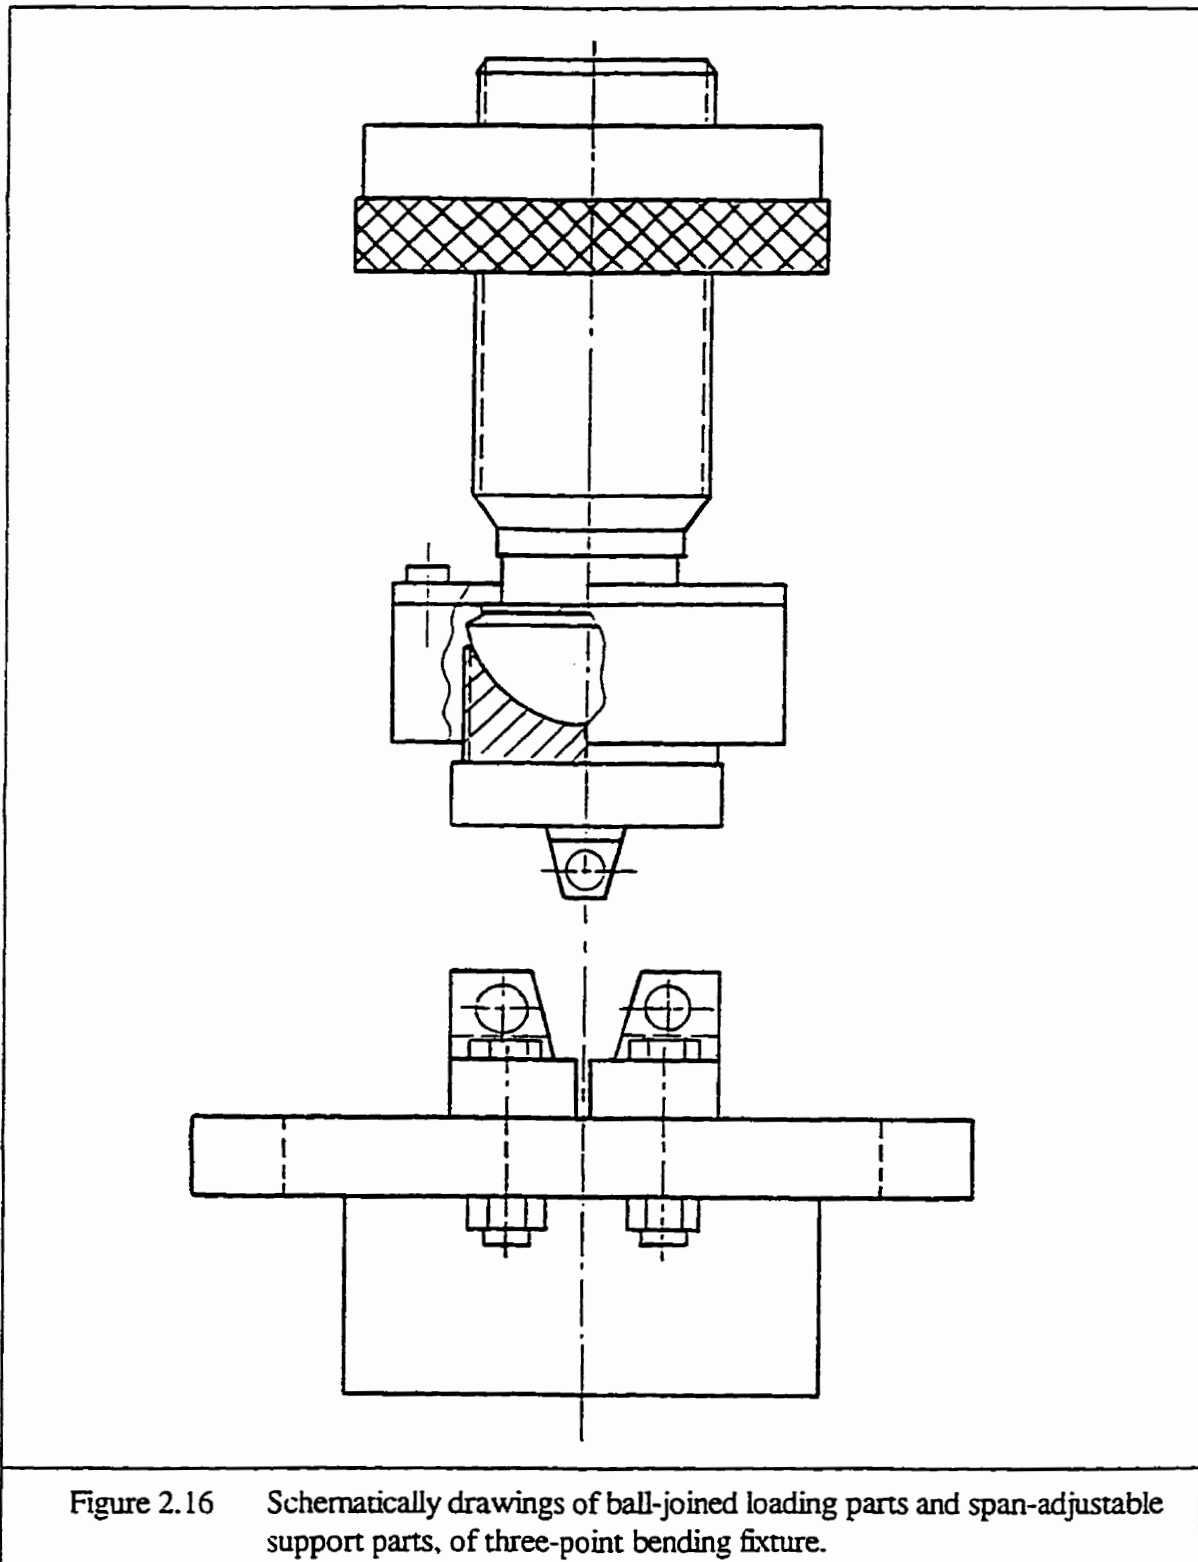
Schematically drawings of ball-jointed loading parts and span-adjustable support parts, of three-point bending fixture.
